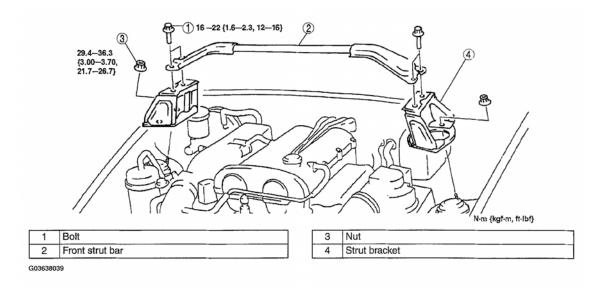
View Of Front Strut Bar & Torque Specifications Courtesy of MAZDA MOTORS CORP.
